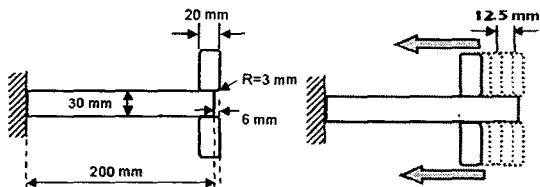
Geometry of the workpiece and the tool for analysis of the incremental plane-strain forging process
